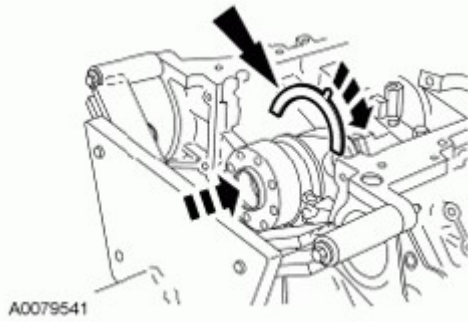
Installing Front Crankshaft Upper Thrust Washer At Front Of No. 4 Rear Bulkhead
